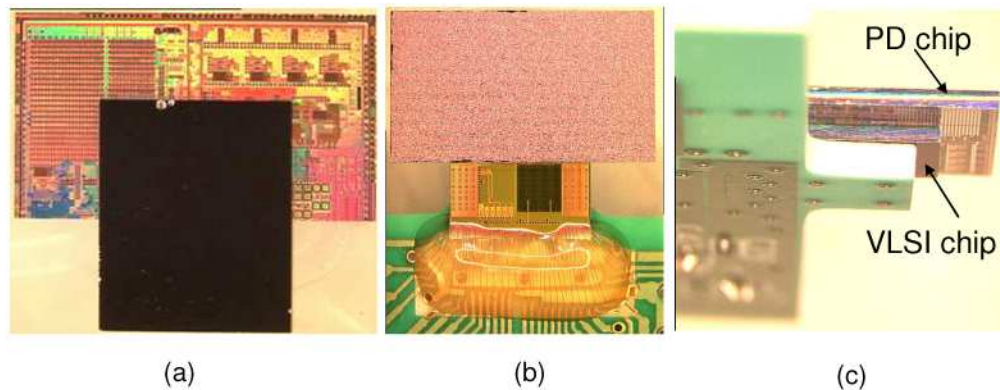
Photo of the hybrid chip assembly, with VLSI receiver chip facing up. (b) is a photo of the integrated receiver, showing hybrid bonded VLSI receiver chip (facing up) and photodetector chip (facing down) wire bonded on a test PCB. (c) shows a side view of the hybrid "CMOS photonic-bridge".
